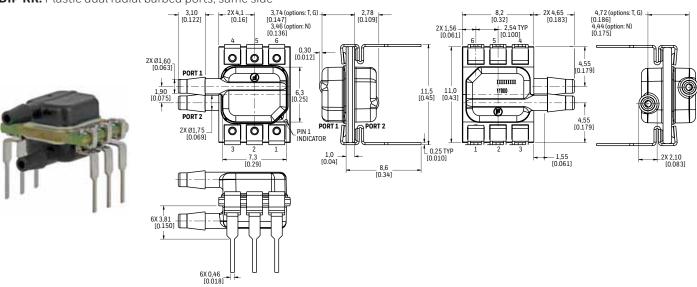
DIP PACKAGE DIMENSIONAL DRAWINGS (CONTINUED)
